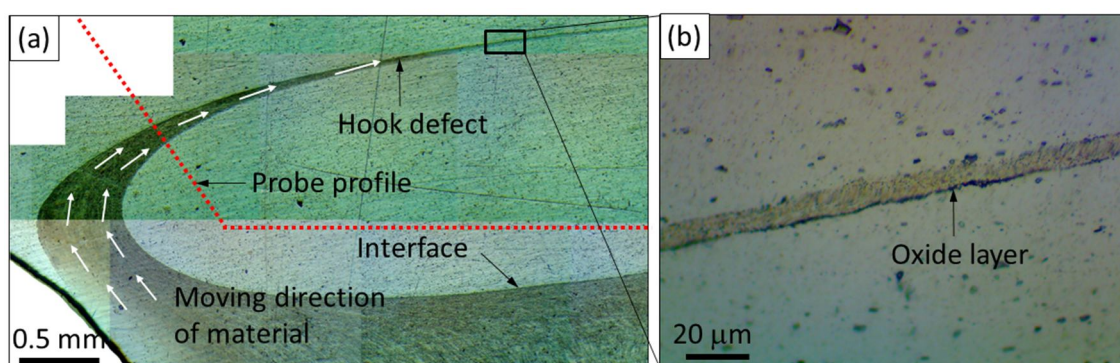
(a) Hook defect produced by welding speed of 50 mm/min and (b) oxide layer along hook defects.
